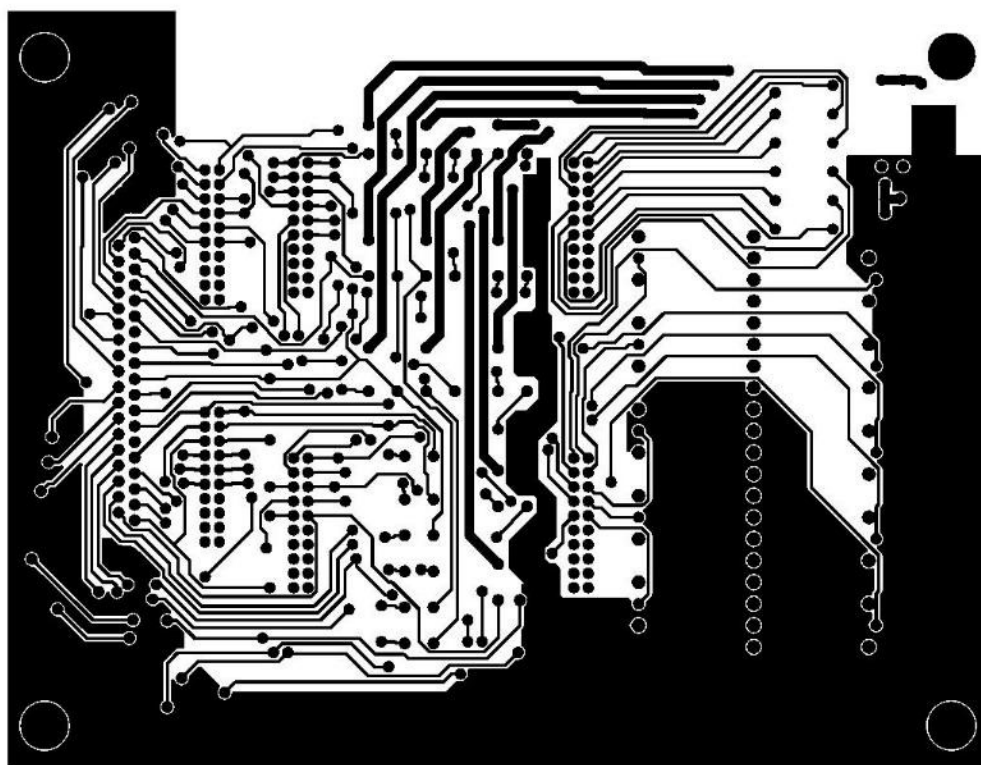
Miniature Semiconductor Breakout Box PCB Mask Bottom
